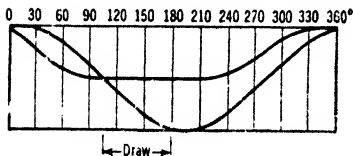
Timing relations between the drawing and blank-holding slides of toggle drawing presses.
